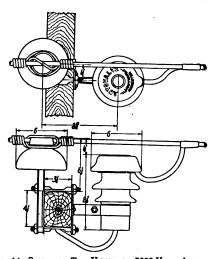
Side and Top Views of 7500-Volt Arrester with Form C Mounting Bracket and Pierce Clamp Pin
